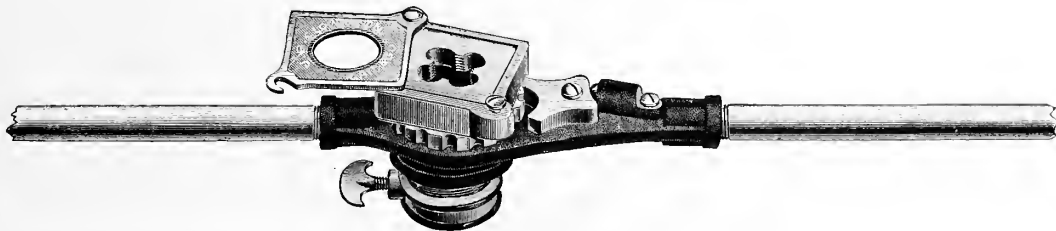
MILLER'S REVERSIBLE RATCHET DIE PLATE.
